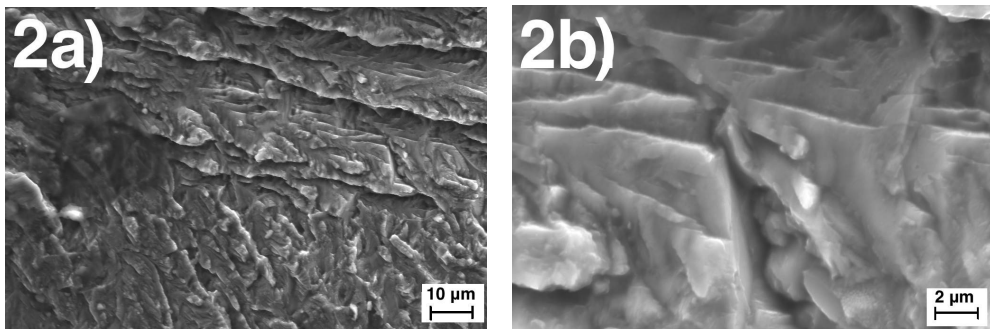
River patterns and slip bands on the fractured surface of AA6082.52-T6 as welded.
